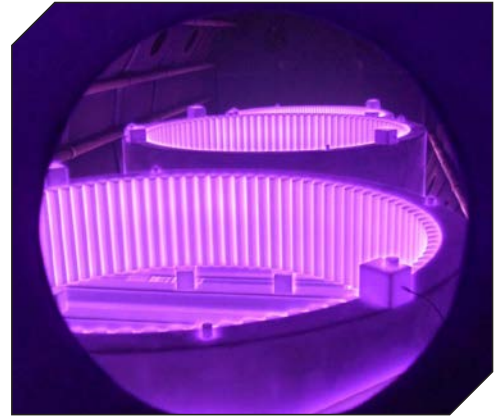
A PPD treatment in a pulsed-plasma atmosphere not only protects large automotive forming tools, but also large, heavy-industrial parts such as these gears for wind turbines.
